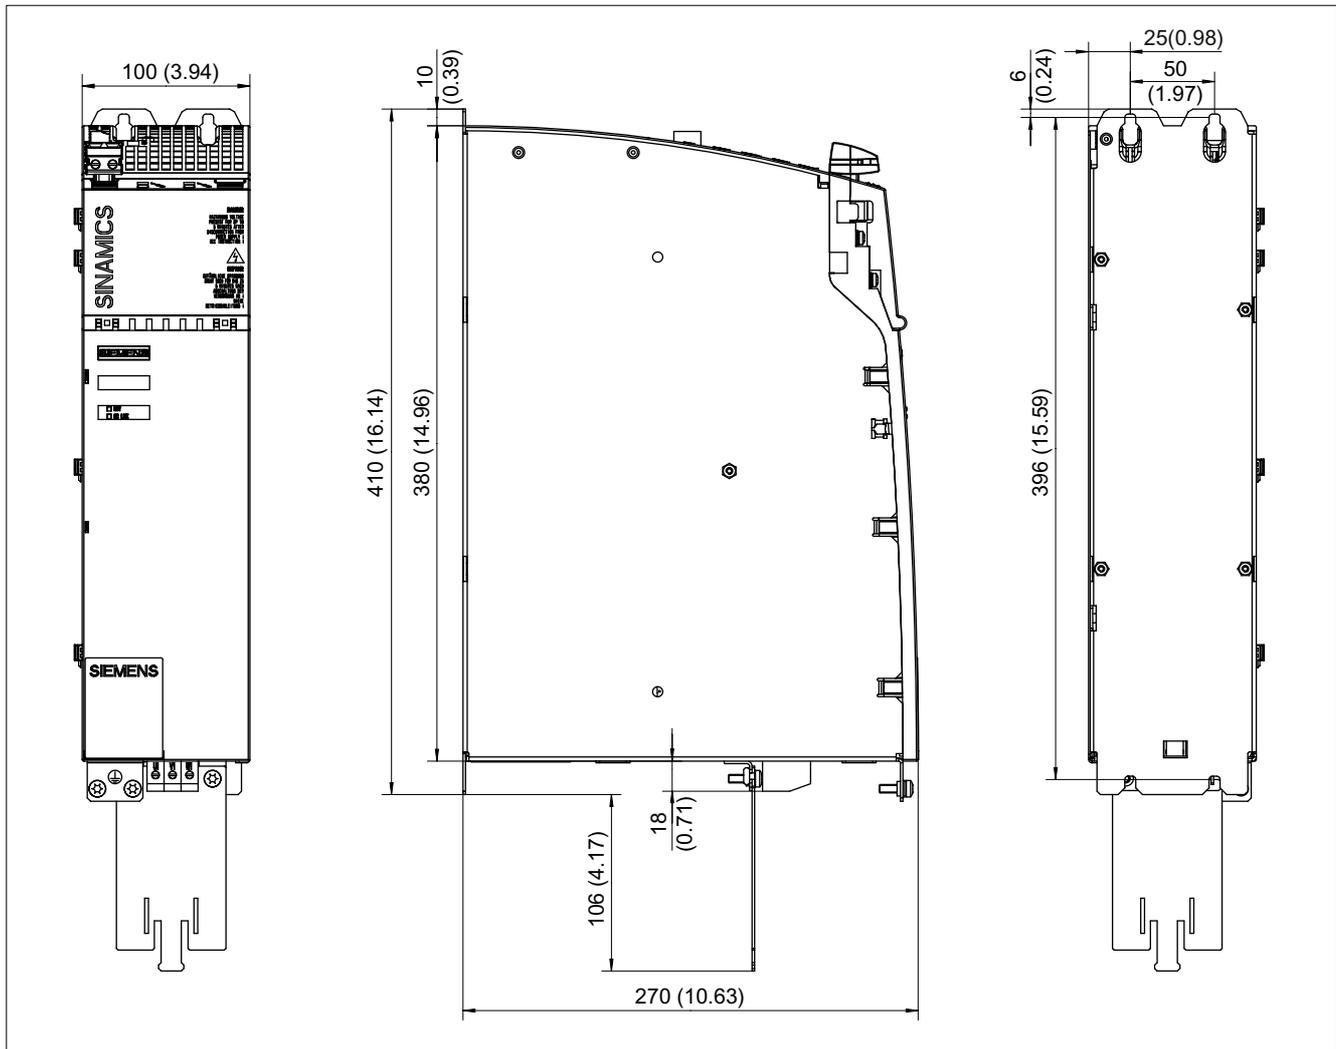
Dimension drawing of Smart Line Module with internal air cooling (16 kW), all dimensions in mm and (inches)
